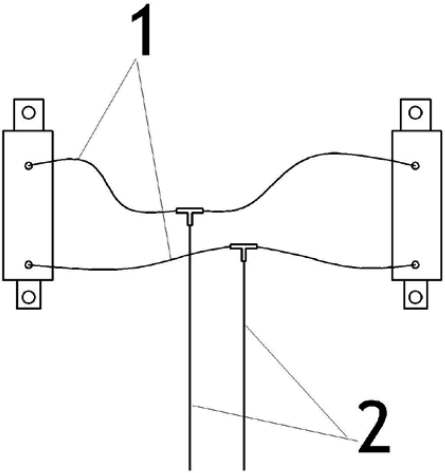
Hydraulic system for adjusting the working depth of TOP 2,5 – 3,0: 1 – 1 m hydraulic hose (4 pcs), 2 – 2 m hydraulic hose (2 pcs)
